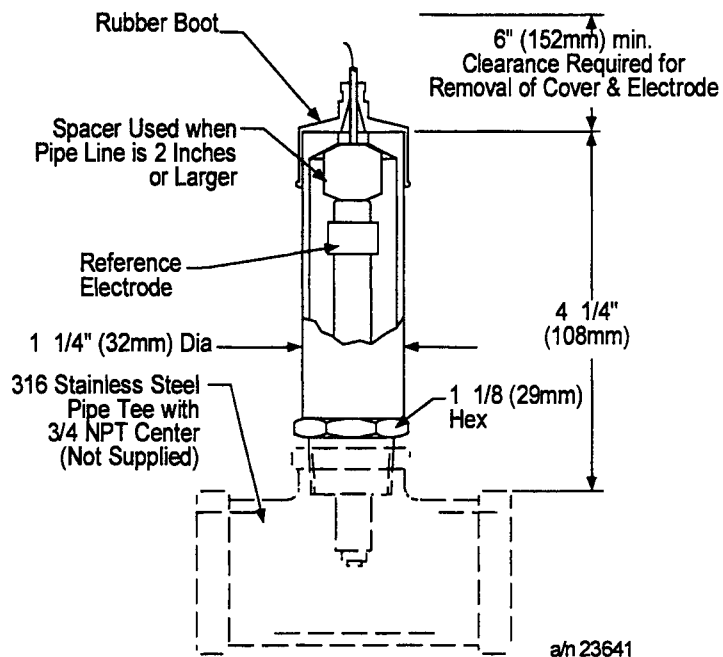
Assembled Mounting Using a Reference Electrode (Spacer shown above electrode provides greater depth of insertion needed for larger pipes)
